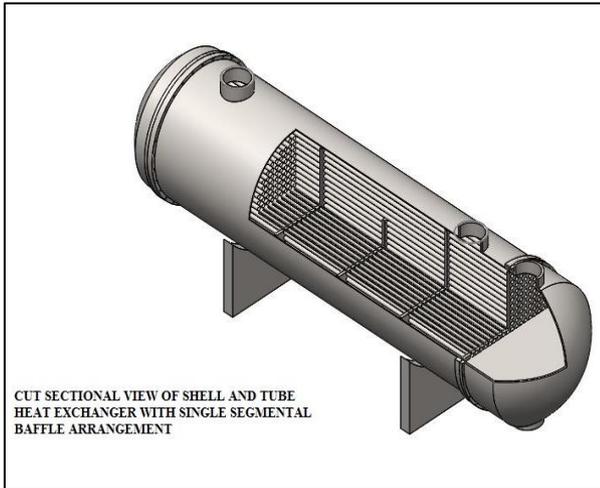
Cut-sectional view of modelled shell and tube heat exchanger with single segmental baffle arrangement
